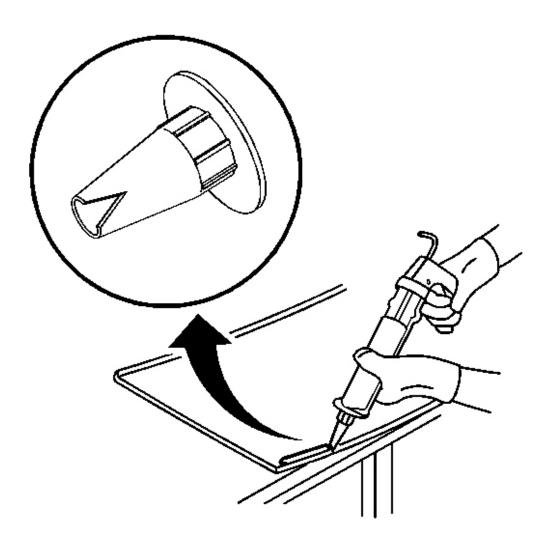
View Of Modified Applicator Nozzle Courtesy of GENERAL MOTORS CORP.
